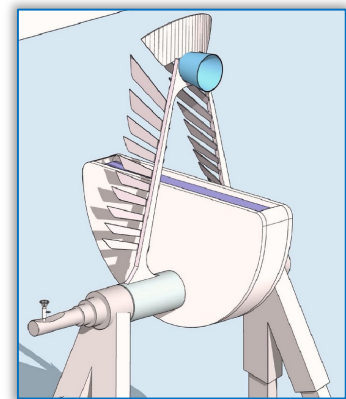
Boom with 20 wings, a bucket, a shovel, sump, double shaft and public tap
